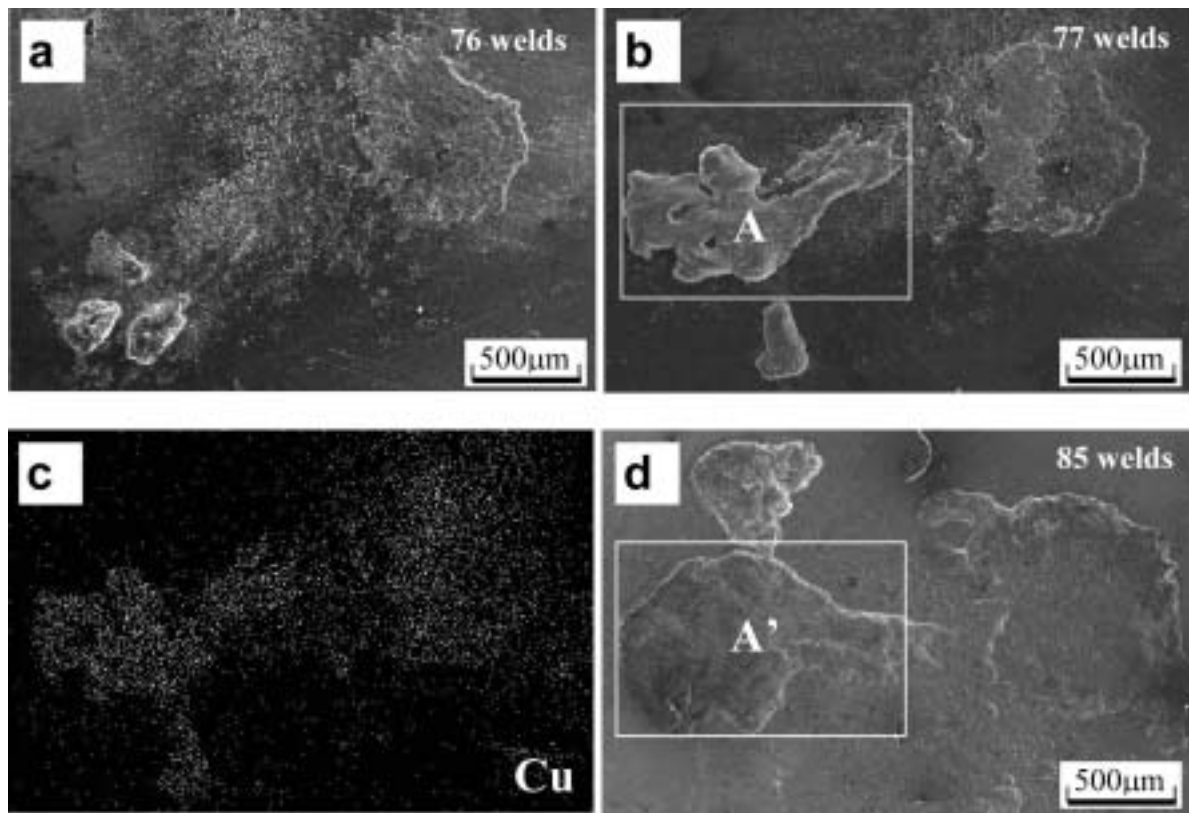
Progress of pitting showing (a) material pickup on the Al sheet after 76 welds, (b) after 77 welds, (c) Cu mapping of (b), and (d) corresponding pits formed on the electrode tip face after 85 welds.
